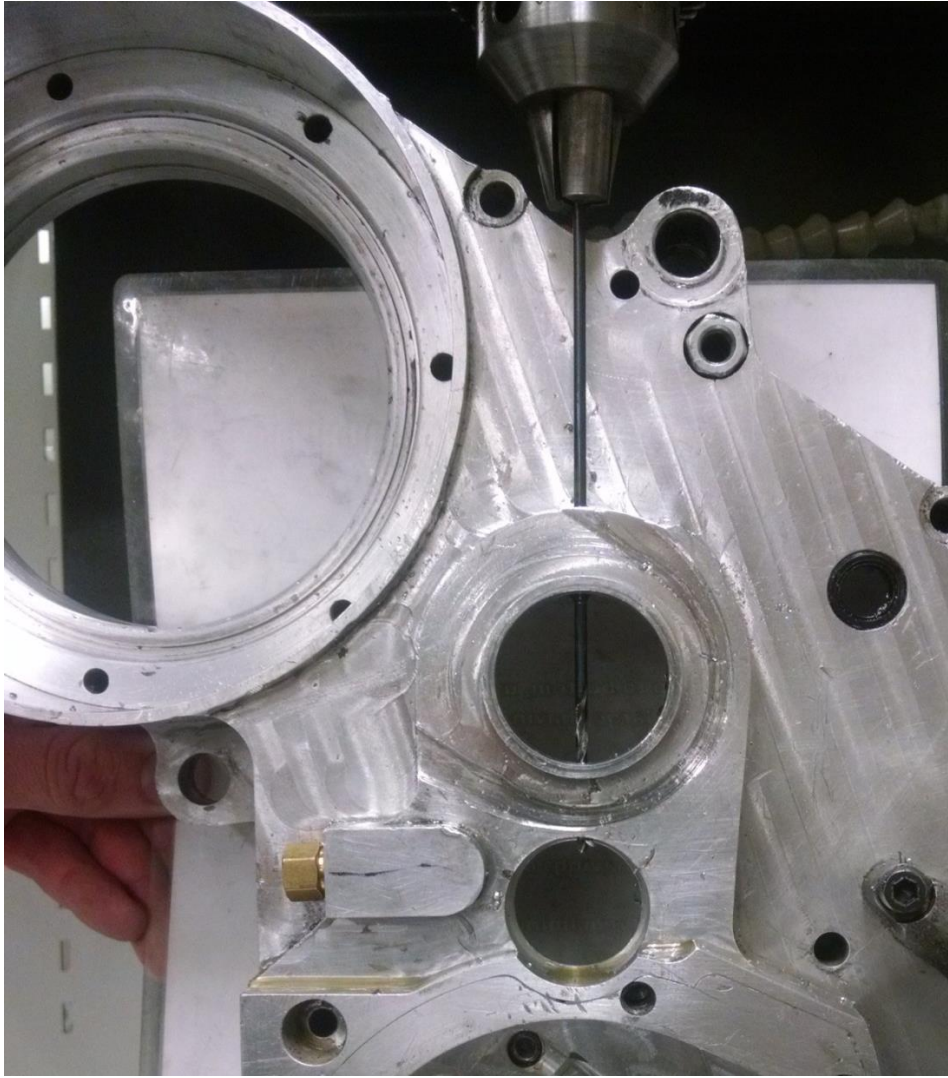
Drilling of Oil Galley from Counter Shaft to Output Shaft
